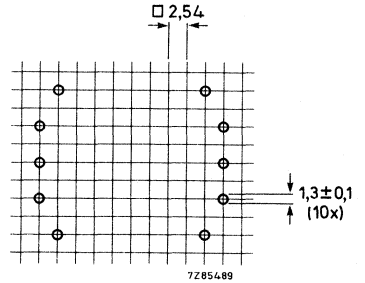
Hole pattern for mounting on a printed wiring board (solder side).
